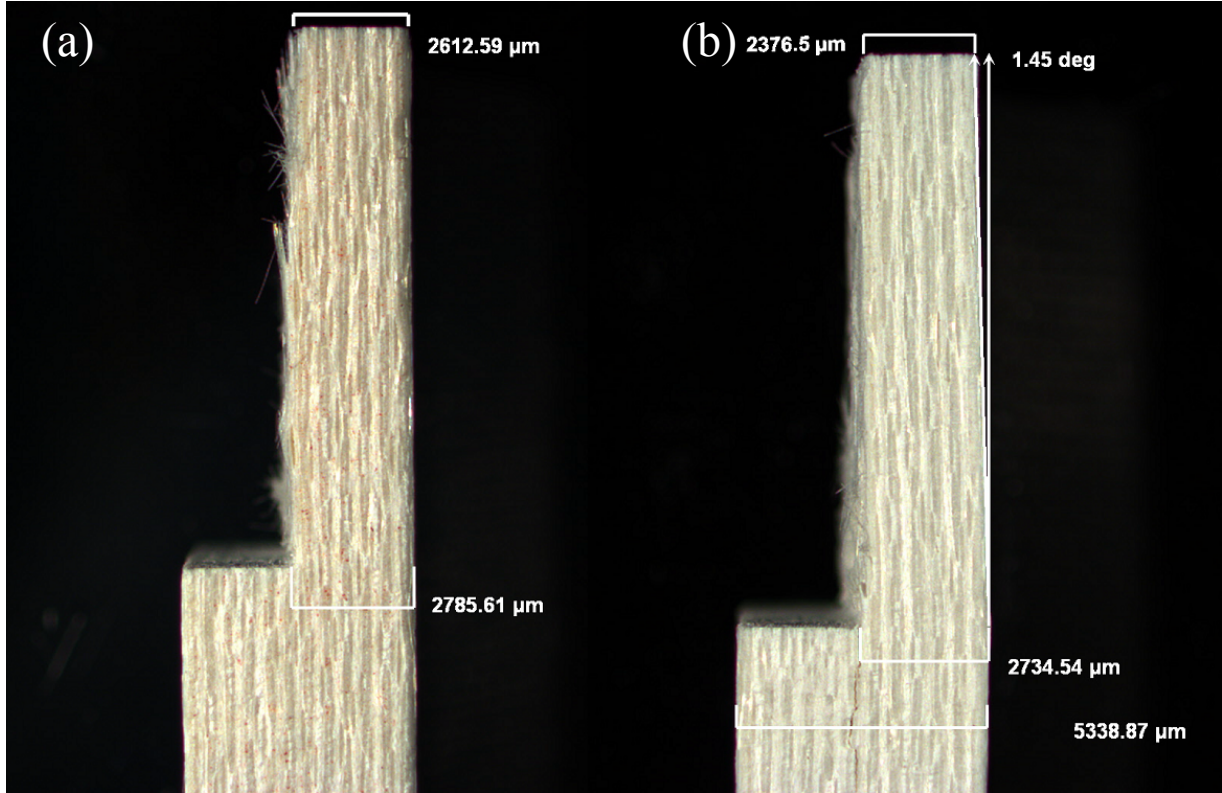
Side views of N720/A DNS fracture surfaces tested at 1200°C, -6.5 MPa creep. Specimen (a) was tested in air and specimen (b) was tested in steam.
